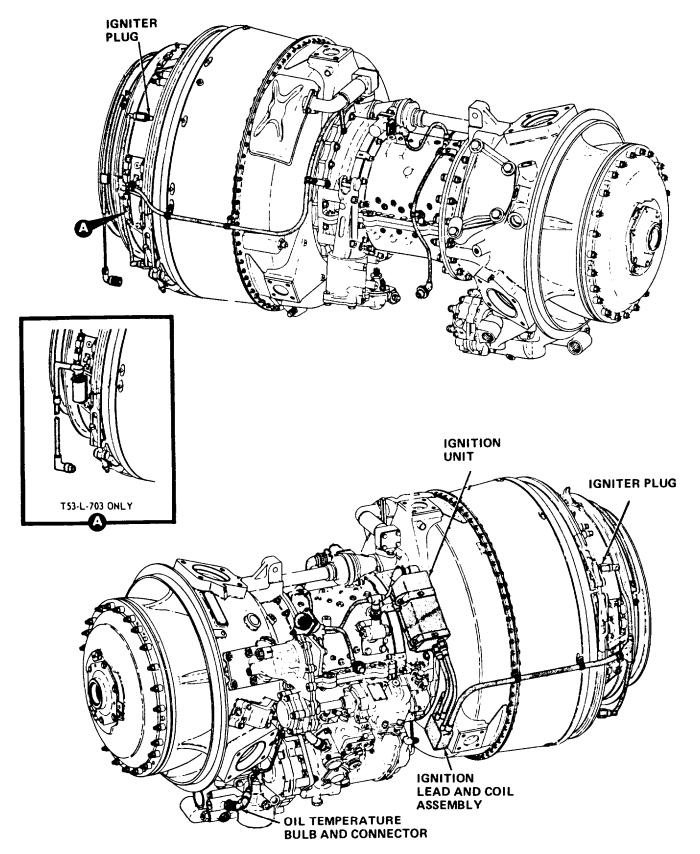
Electrical System External Compnents (T53-L-13B/703 Engines)
